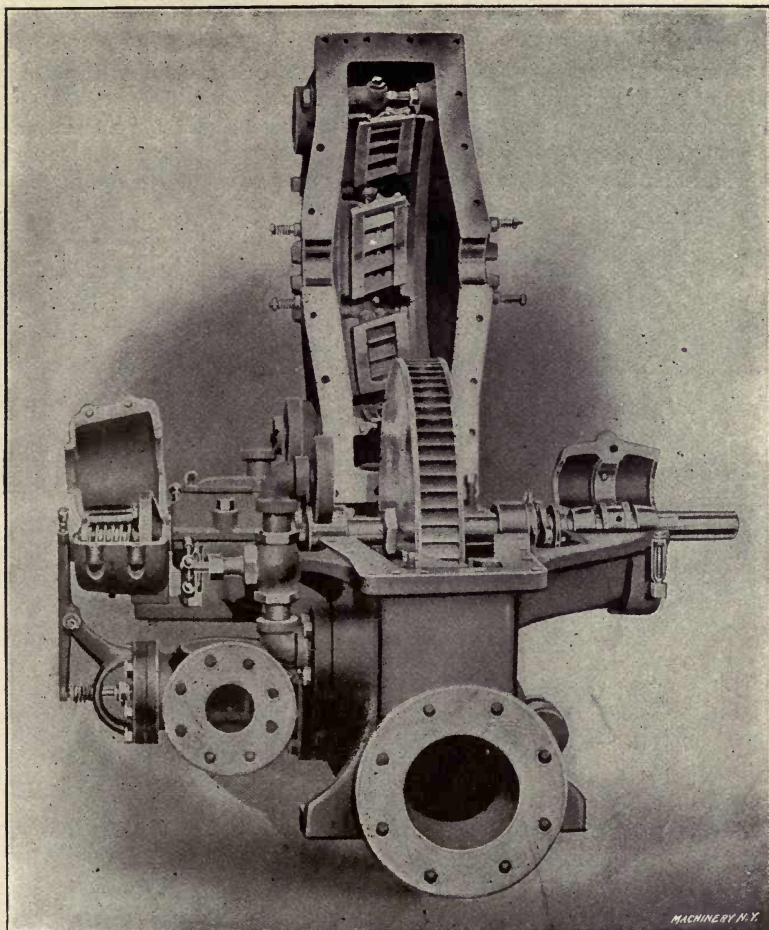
General View of the Terry Steam Turbine, showing how Casing is parted Horizontally
